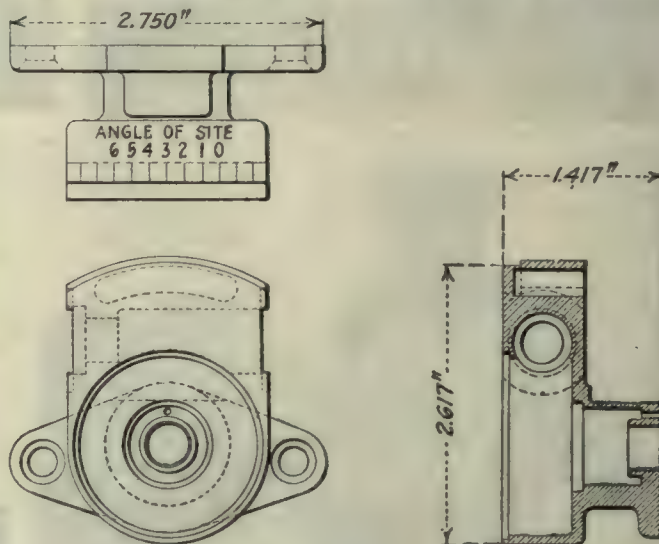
DETAILS OF THE ANGLE OF SITE WORM HOUSING
